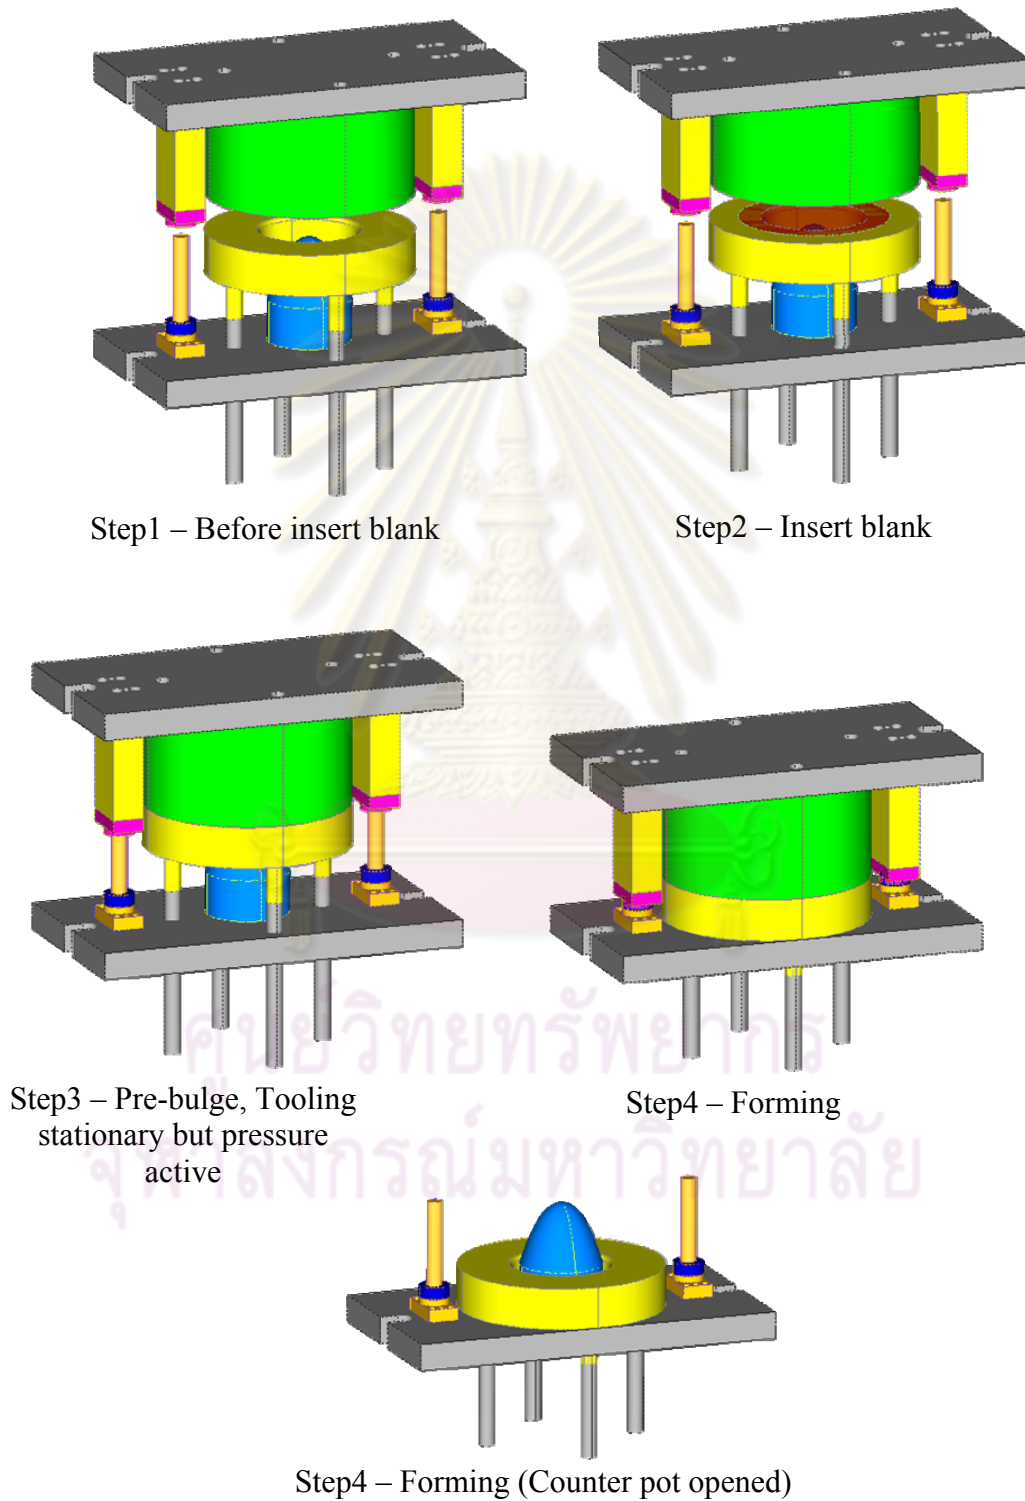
Hydromechanical deep drawing die of parabolic part
